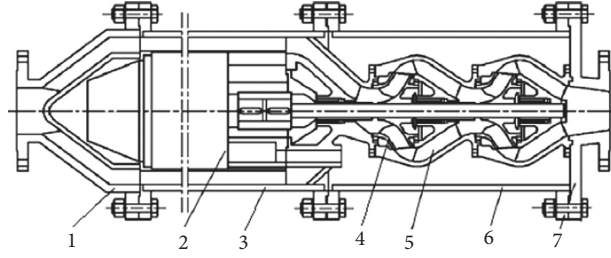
Overall structure of the two-stage electric lifting pump. 1, inlet flange; 2, motor; 3, motor cylinder body; 4, impeller; 5, diffuser; 6, pump cylinder body; 7, outlet flange.
